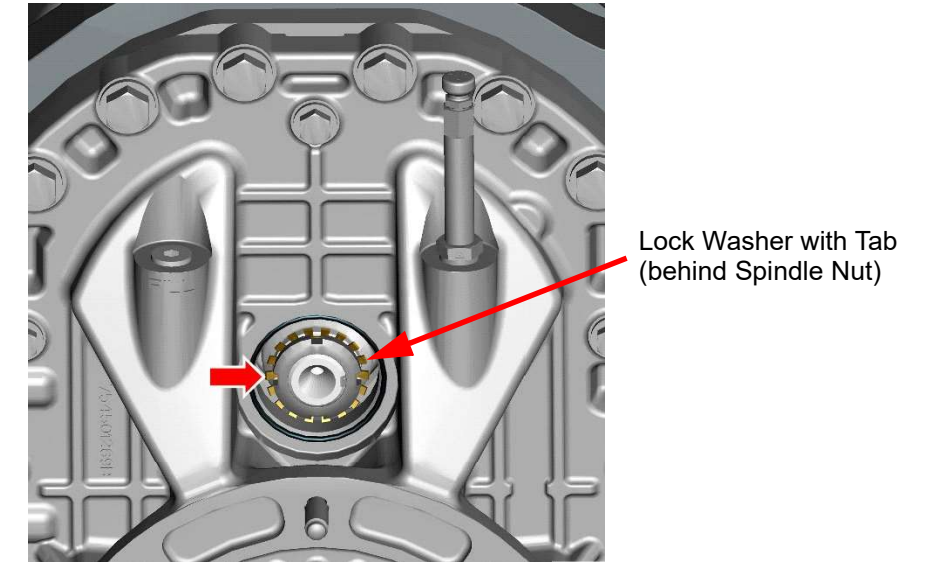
Bending a Tab on the Spindle Nut Lock Washer
